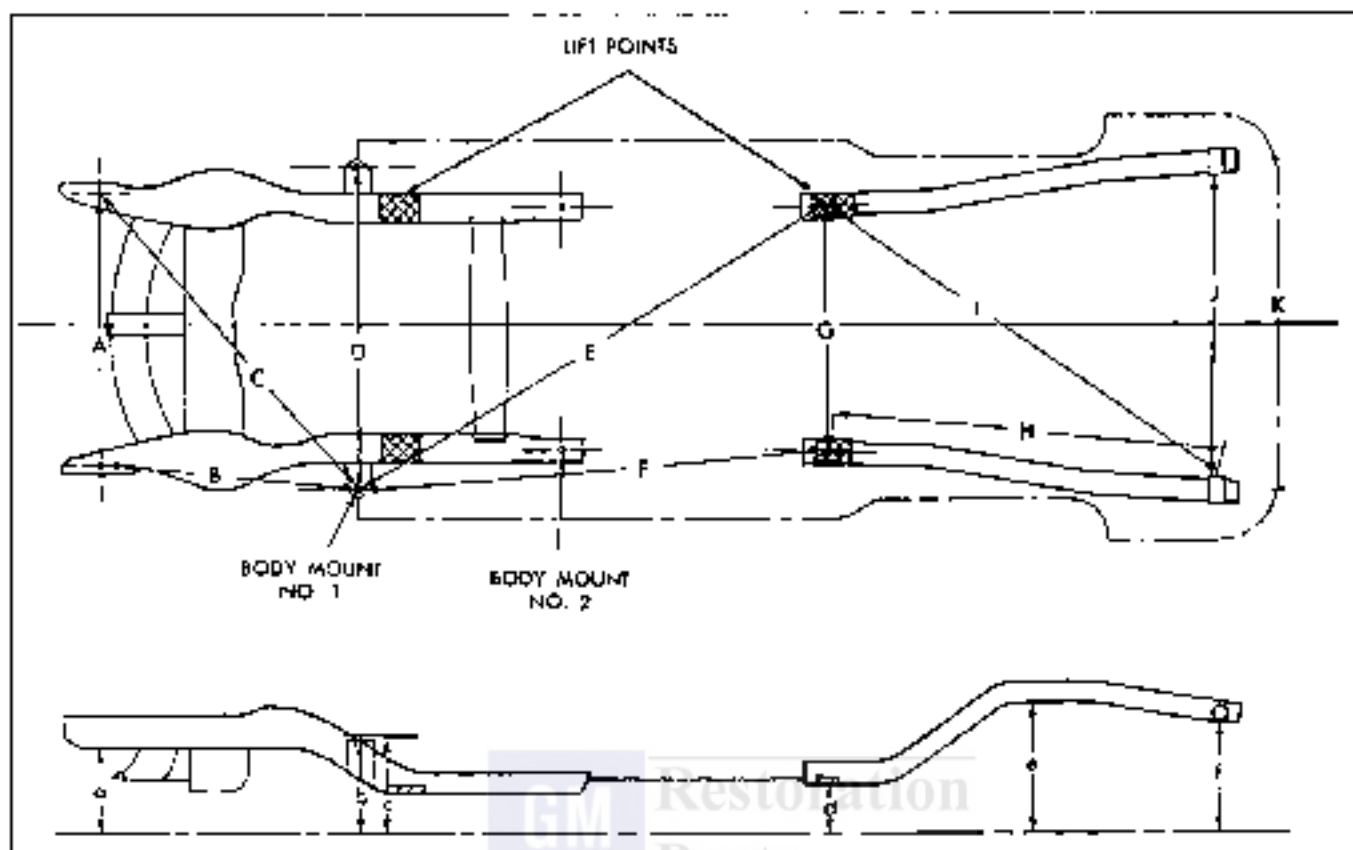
Fire-crack Dimensions, Lift Points and Body Bolt Locations
